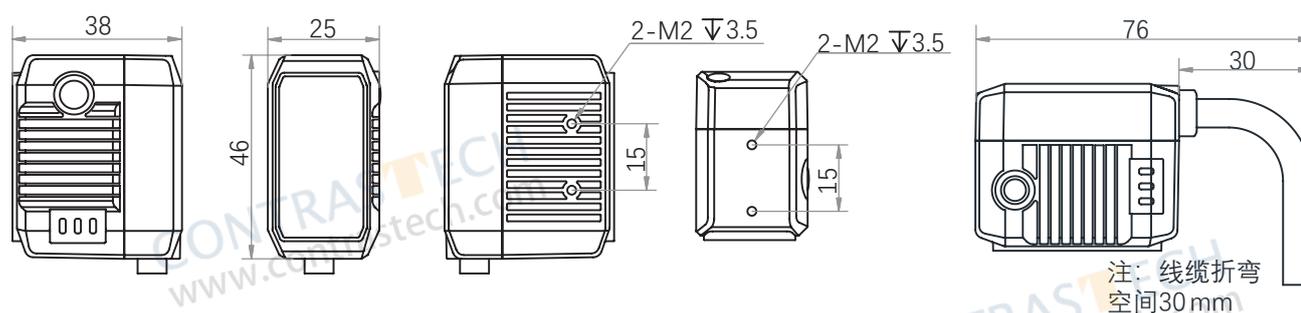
Mechanical Dimensions (in mm) of the fixed focal type code reader with 46 * 38 * 25 mm.(Focus cannot be adjusted).
